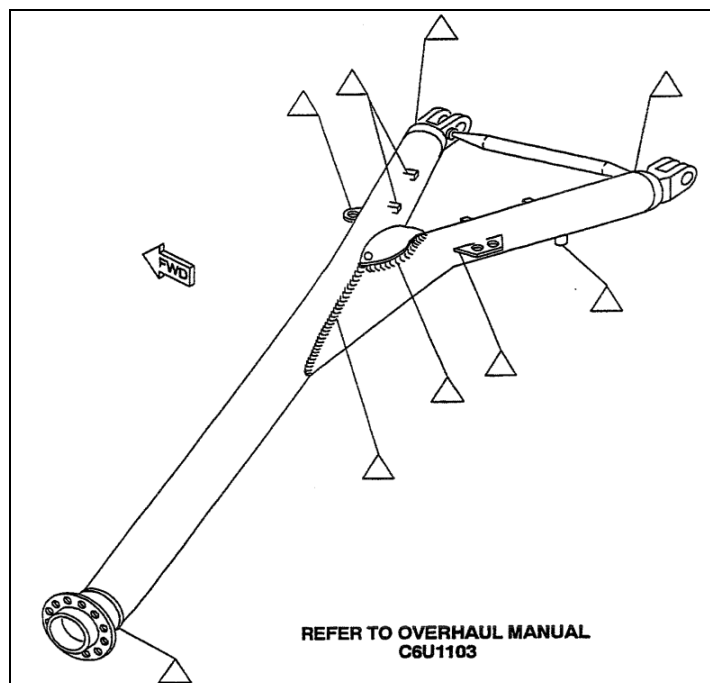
Inspection points according to PSM 1-6-7 Part 3
